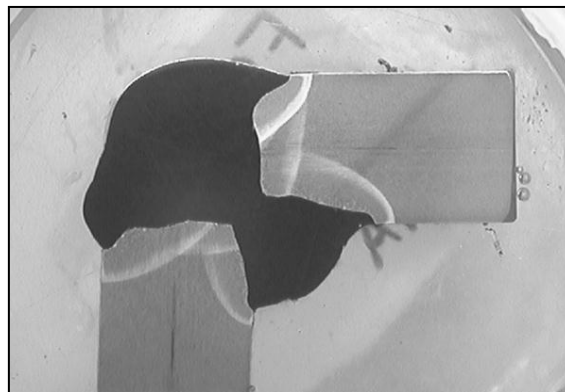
Weld cross-section of the joint produced by current FCAW procedure.
